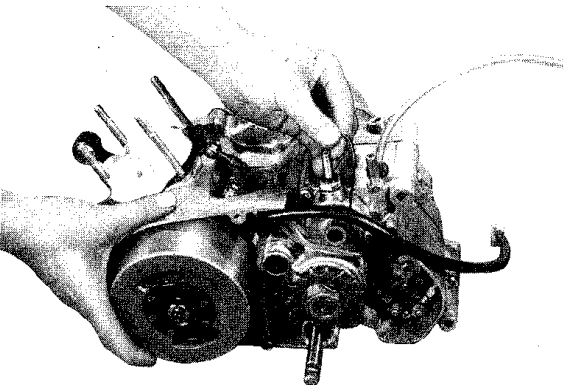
Disconnecting neutral indicator switch wire
